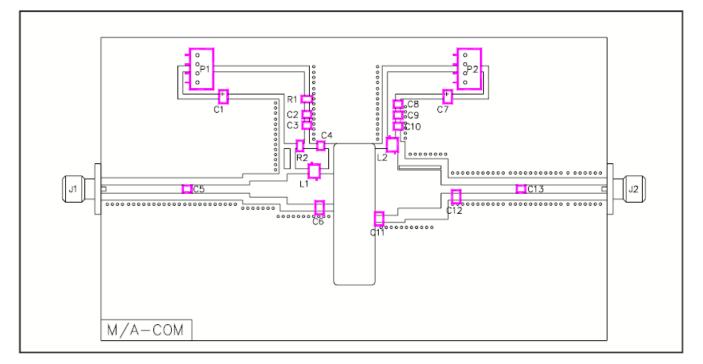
1620—1670 MHZ TEST FIXTURE COMPONENT LAYOUT
